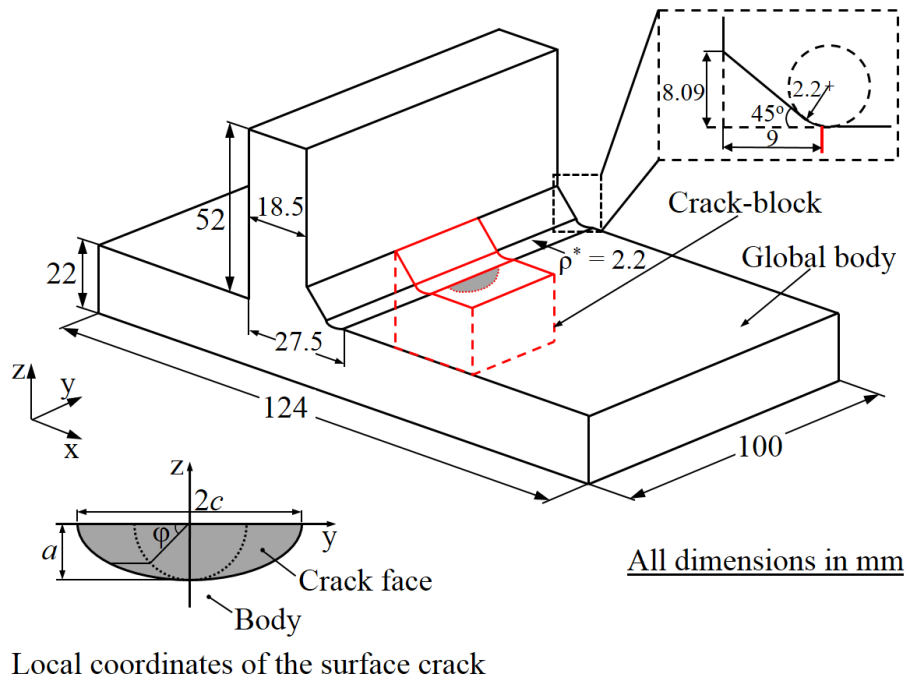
Surface cracked T-butt welded body. (Note: ρ^* is the radius of weld toe).
